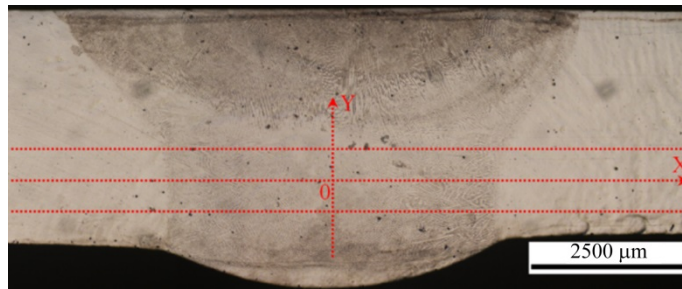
Macrostructure of the G-35 alloy welded joint.
